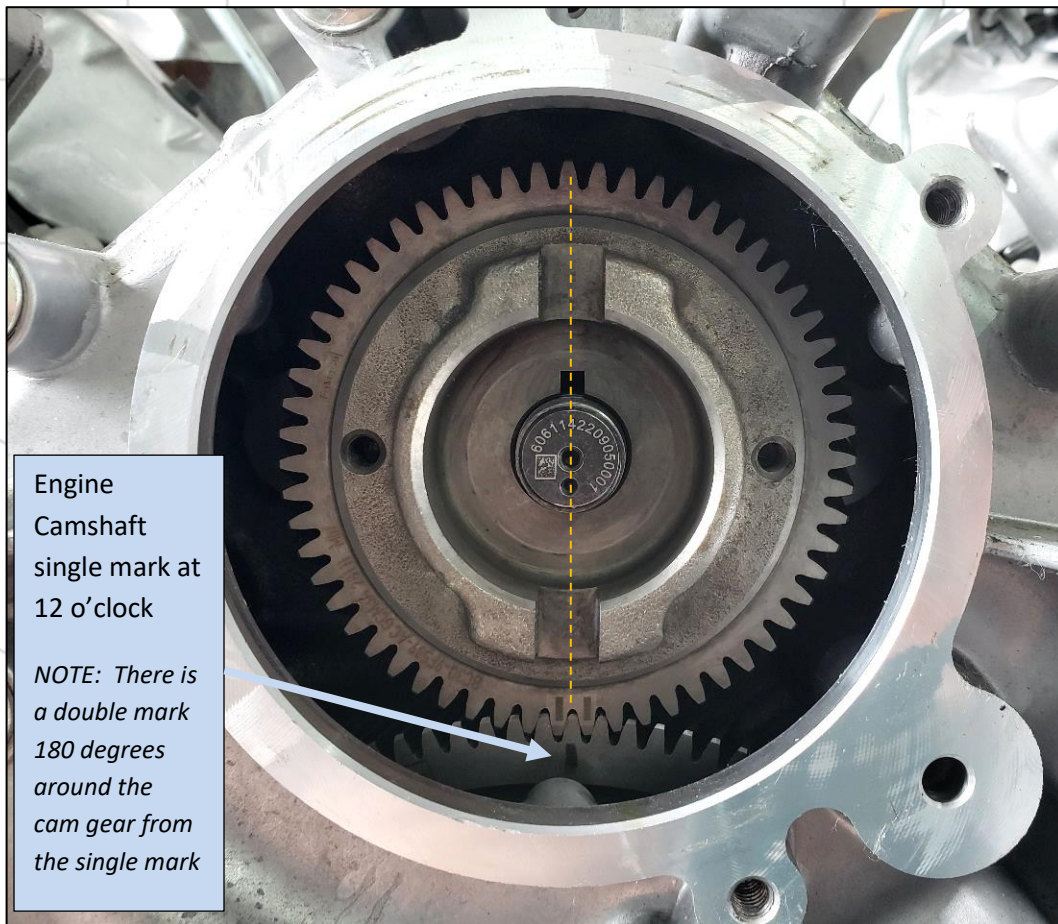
Rotate engine to TDC – Single Mark on the Engine Camshaft at 12 o'clock
